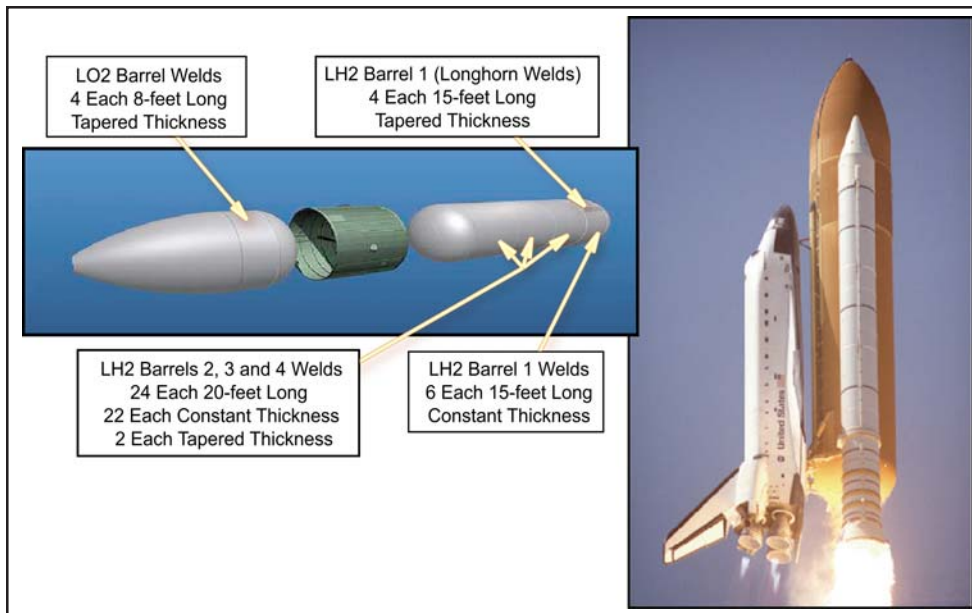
Space Shuttle Main Tank and Welds
